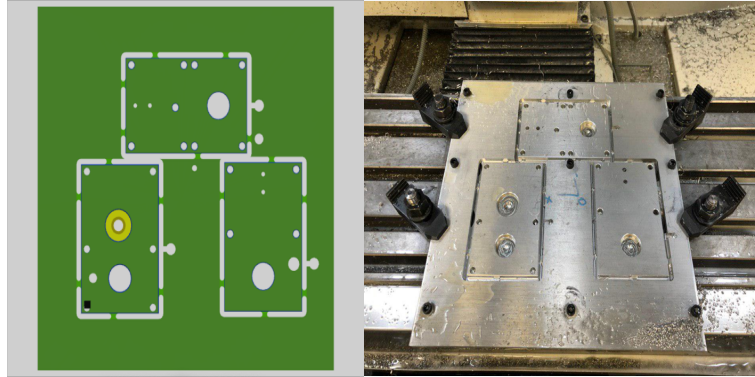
(LEFT) CAD model design of the aluminum pieces. These are used to hold the robots' middle piece, angle feedback sensor and gear system that connects firmly to the support structure. (RIGHT) The Computer Numerical Control (CNC) machine cut of aluminum pieces that is used to hold the robot to the support structure. It uses a number of operations like screwing, pocketing and contouring to get the appropriate finishing to the piece.
